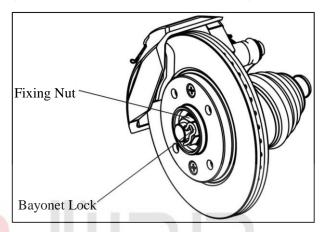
Fix Wheel Hub and Dismantle End Nut
